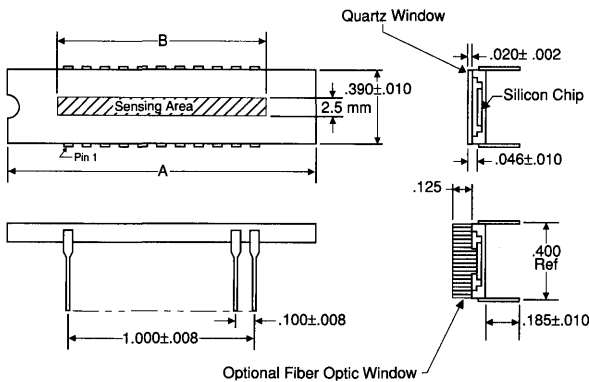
Package Dimensions. Dimensions are in Inches Except Where Millimeters (mm) are Indicated.
